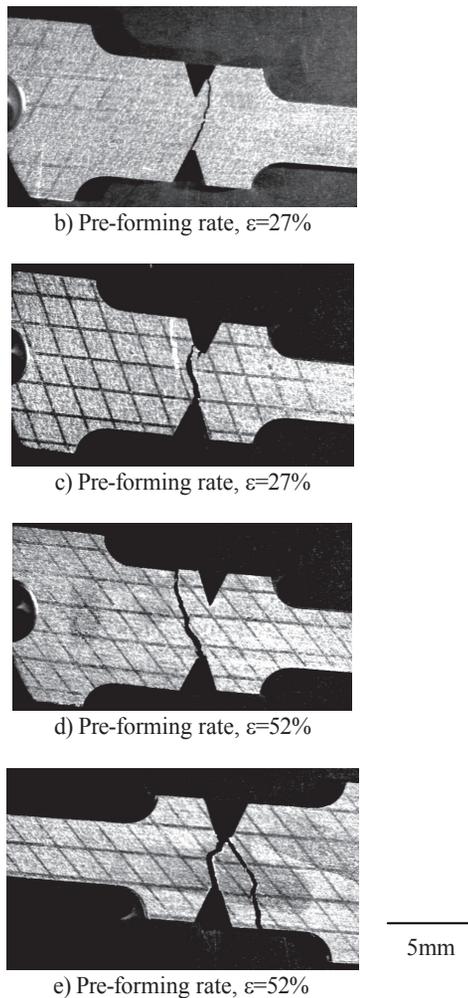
e. Fracture macrophotographs of the specimens under chock at 27 and 52 % of pre-forming conditions
